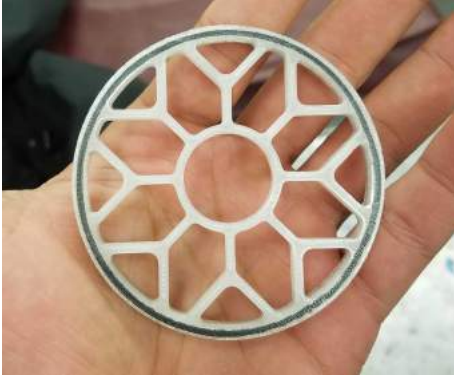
Nylon/Carbon Fiber Composite Landing Gear Wheel
